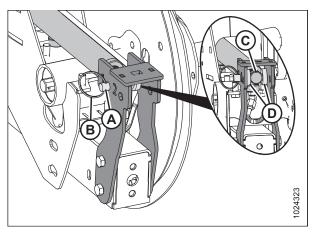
Right Reel Arm Cylinder in Aft Position
